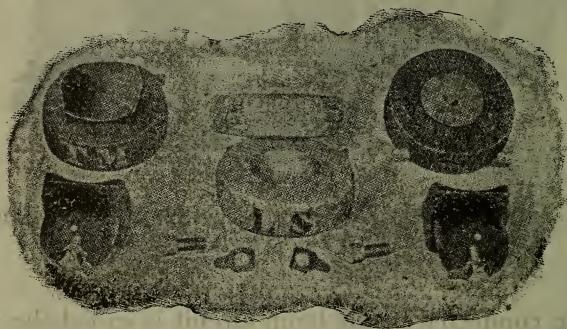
BUCKER FIELD COILS AND POLE PIECES.
